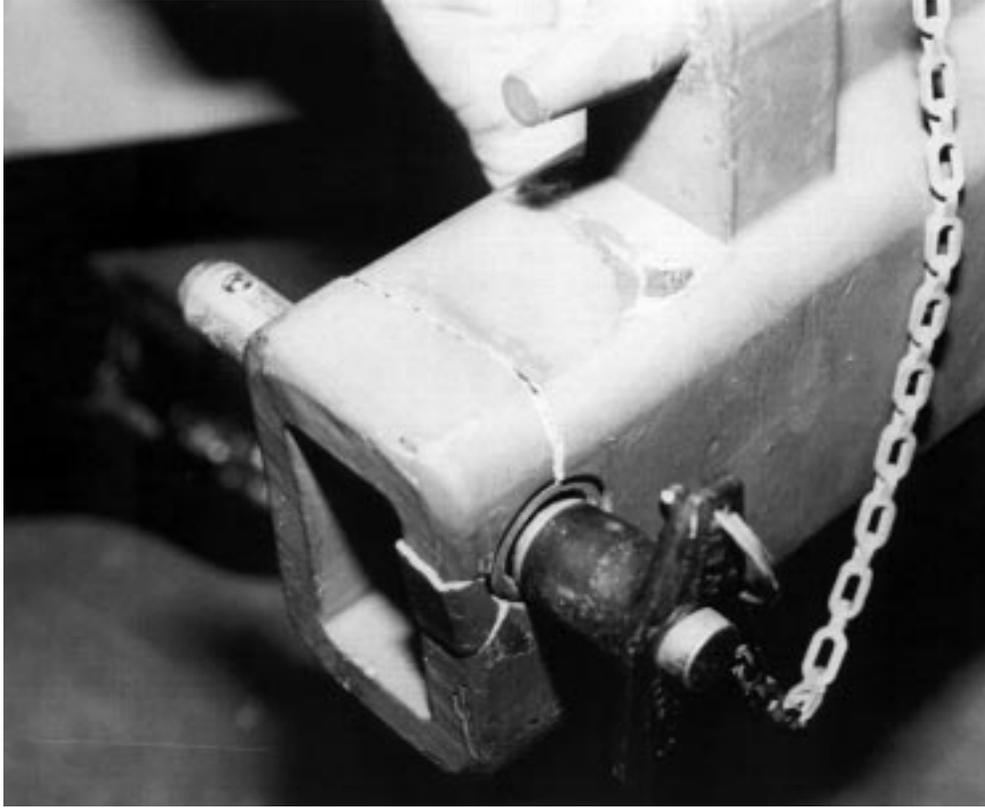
Cracks in caster assembly mounting bracket (barrel caster).
